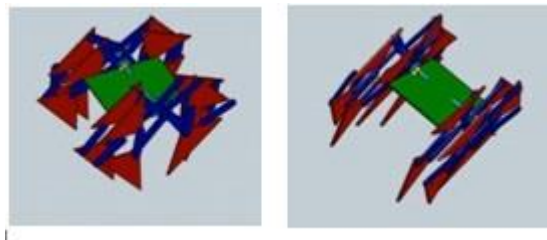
and Figure 9.2 Solid works assembly of the robot.
